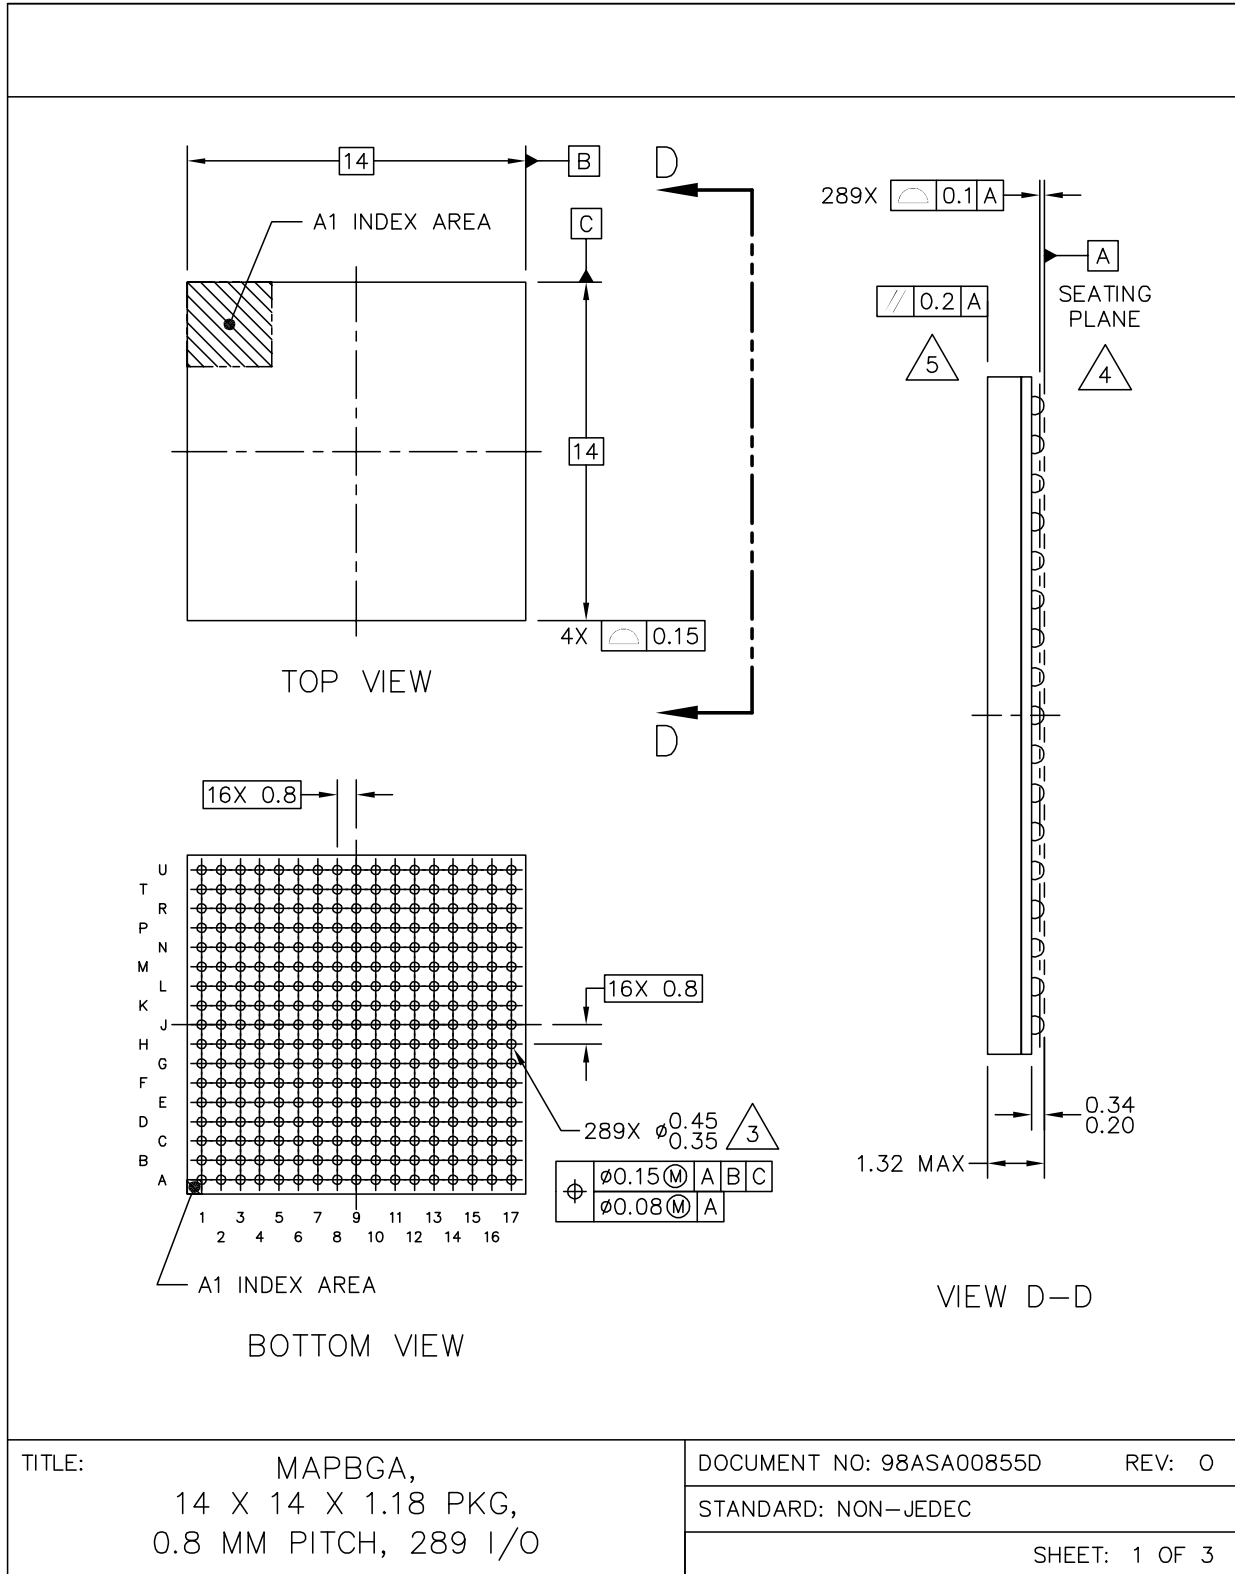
14 x 14 mm BGA, Case x Package Top, Bottom, and Side views
